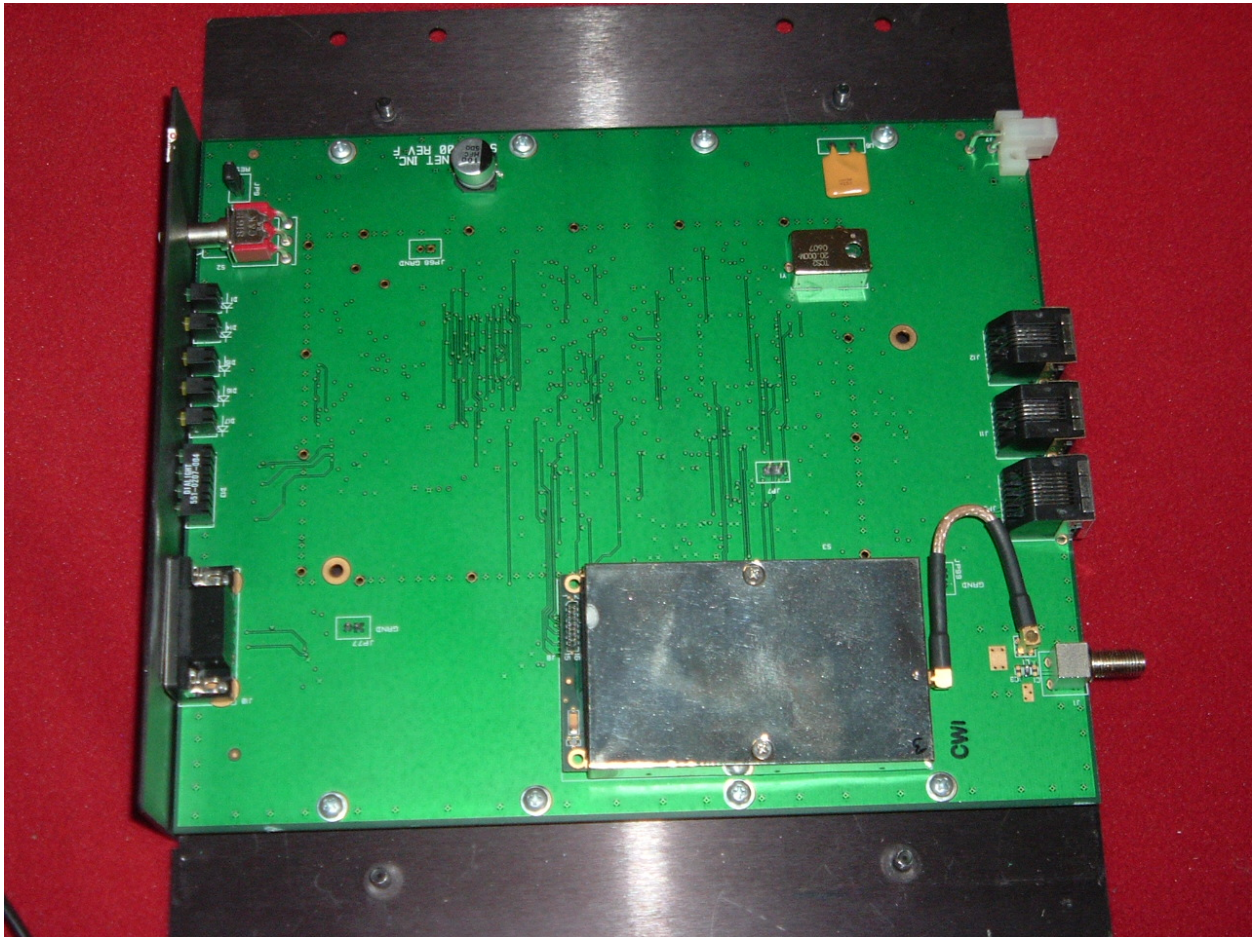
EUT, Bottom View, Cover Opened, Main PCB Removed
